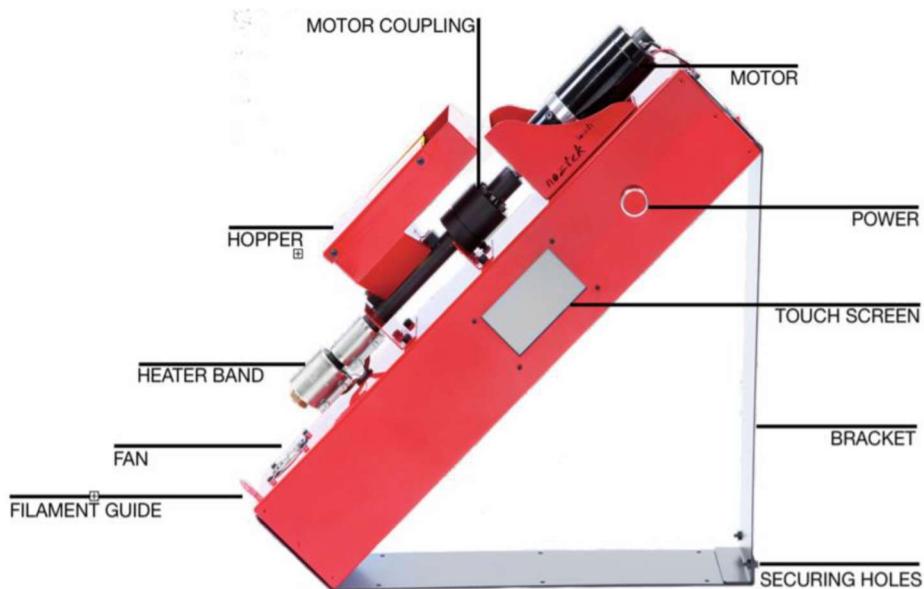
The Noztek touch single screw extruder © Noztek.com 2018
